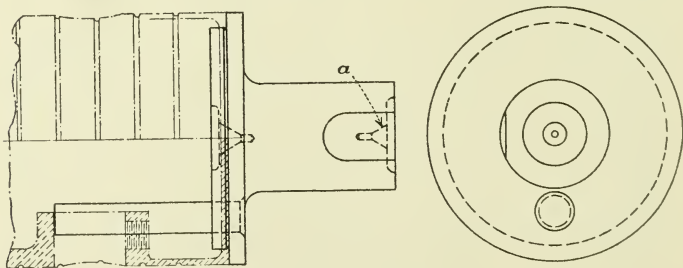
FORM OF CENTER ORIGINALLY USED IN THE PACKARD SHOPS FOR CENTERING AND DRIVING THE PISTONS DURING THE EXTERNAL GRINDING OPERATION
